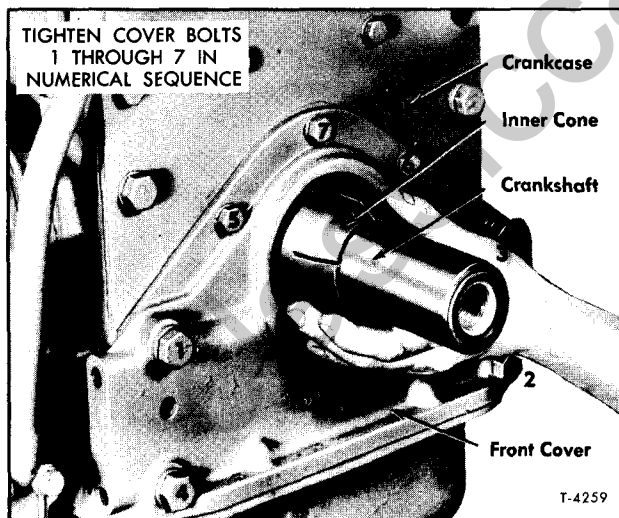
Front Cover and Damper Cone Installation and Bolt Tightening Sequence
